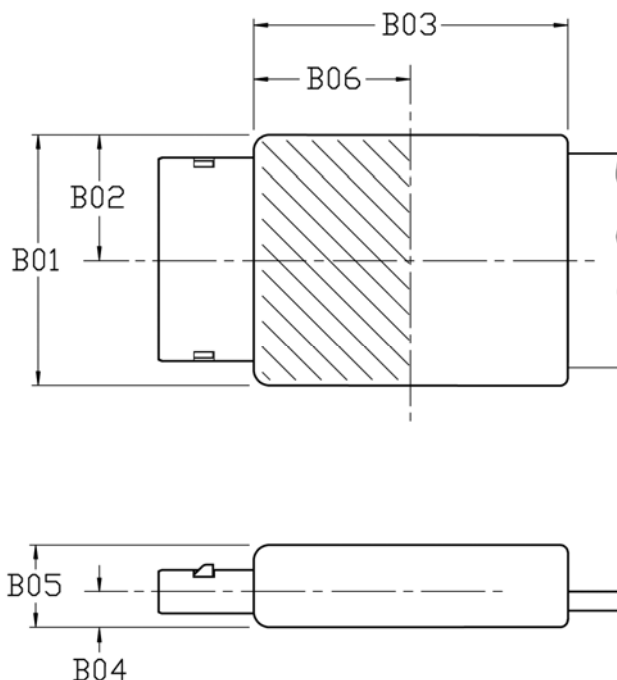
STRAIGHT-OUT CABLE EXIT INTERNAL CABLE ASSEMBLY
